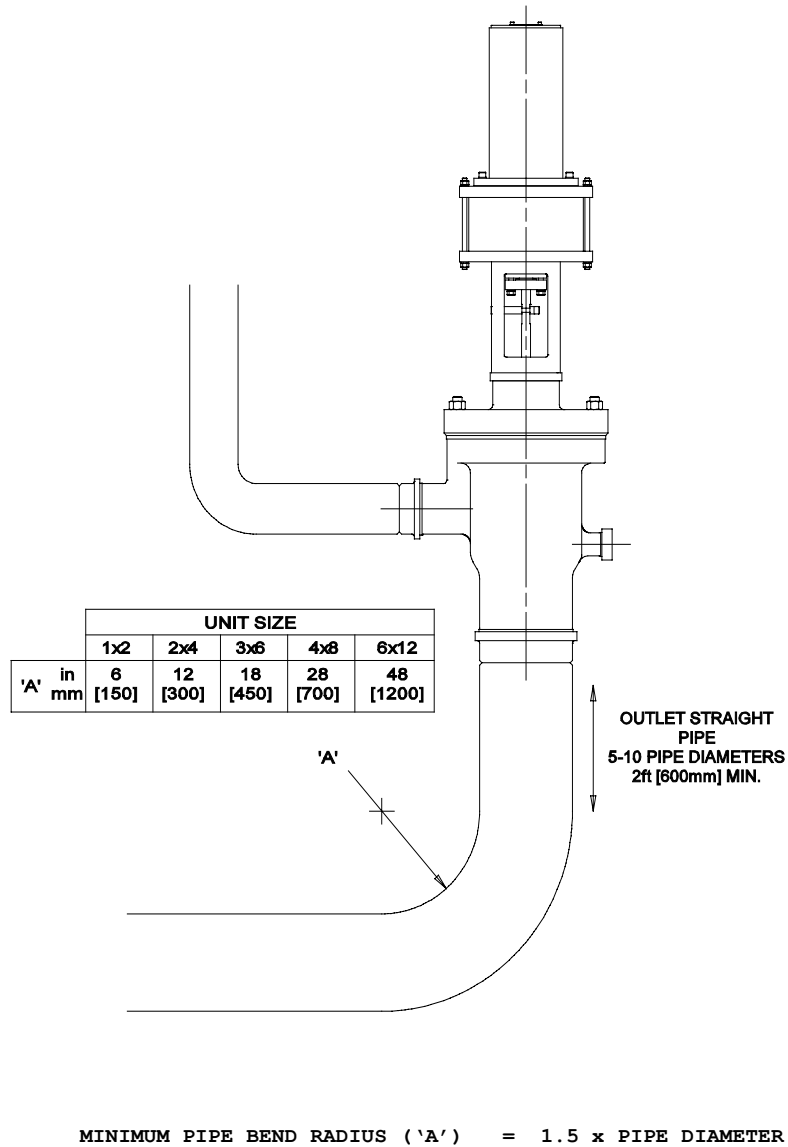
DOWNSTREAM STRAIGHT PIPE RECOMMENDATION
